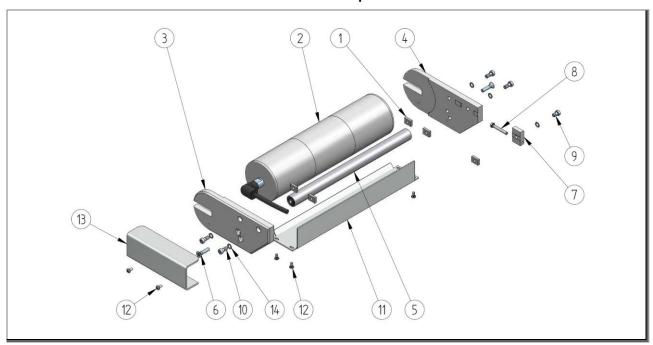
Parts list: Drum motor - drive unit/motor unit - position of drive unit 1234 - ZZ.900.163
